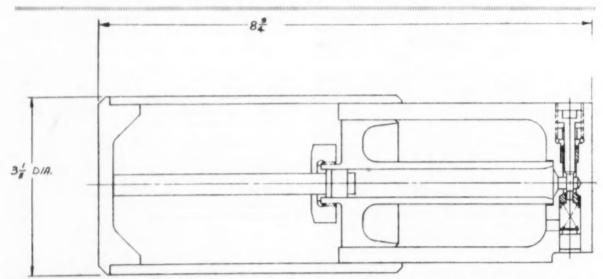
Drawing of proposed liquid spring for light vehicle. One of problems involved in designing these springs is attaining proper sealing, because of high pressures needed.
